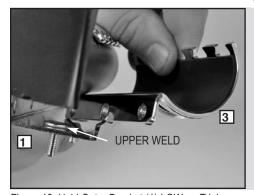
Hold Outer Bracket (1) LOW on Triple Clamp. Inner Bracket (3) must slide between UPPER and LOWER WELD STUDS.
